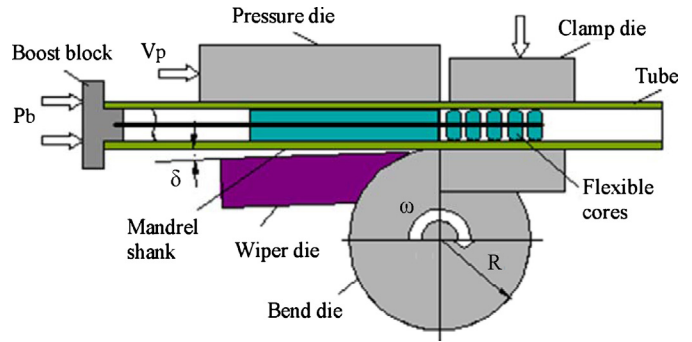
Tools setup and illustration of mandrel-rotary draw bending process.
